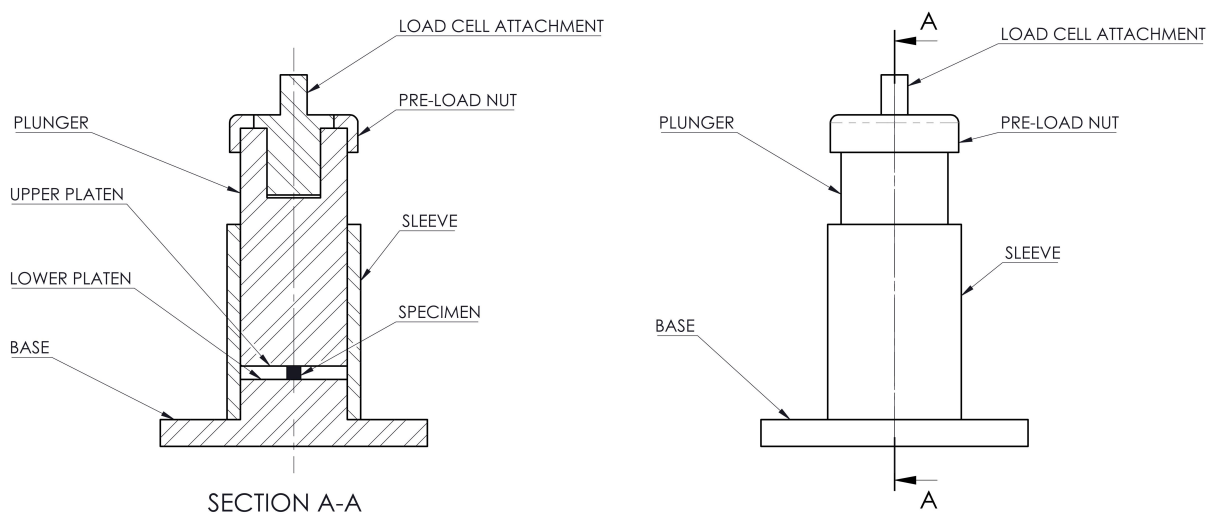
A simplified schematic and cross-section of the custom rig with a specimen in the testing location.
